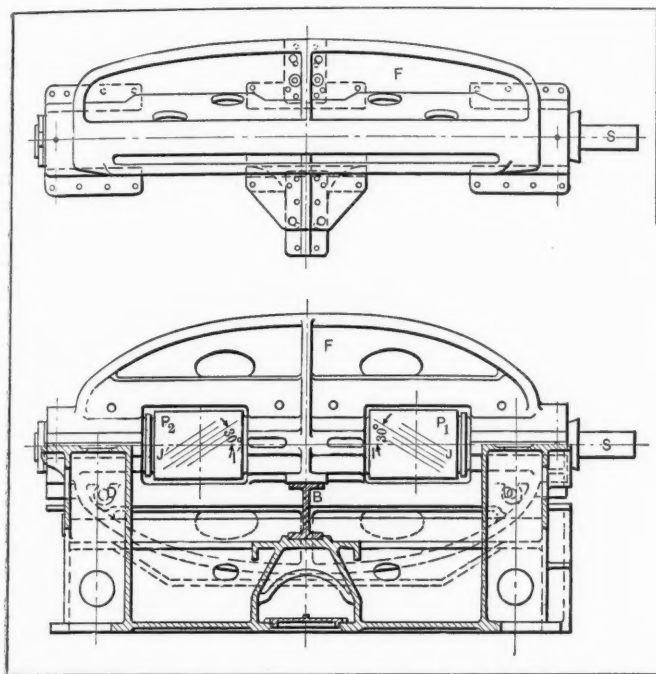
Details of the Construction of the Gear, showing the Floating Frame, etc.
